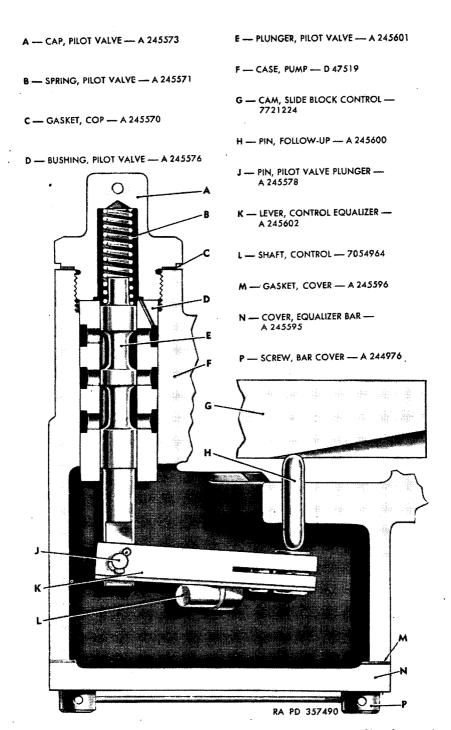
Cross section of hydraulic pump pilot valve plunger, equalizer bar, and follow-up pin.
